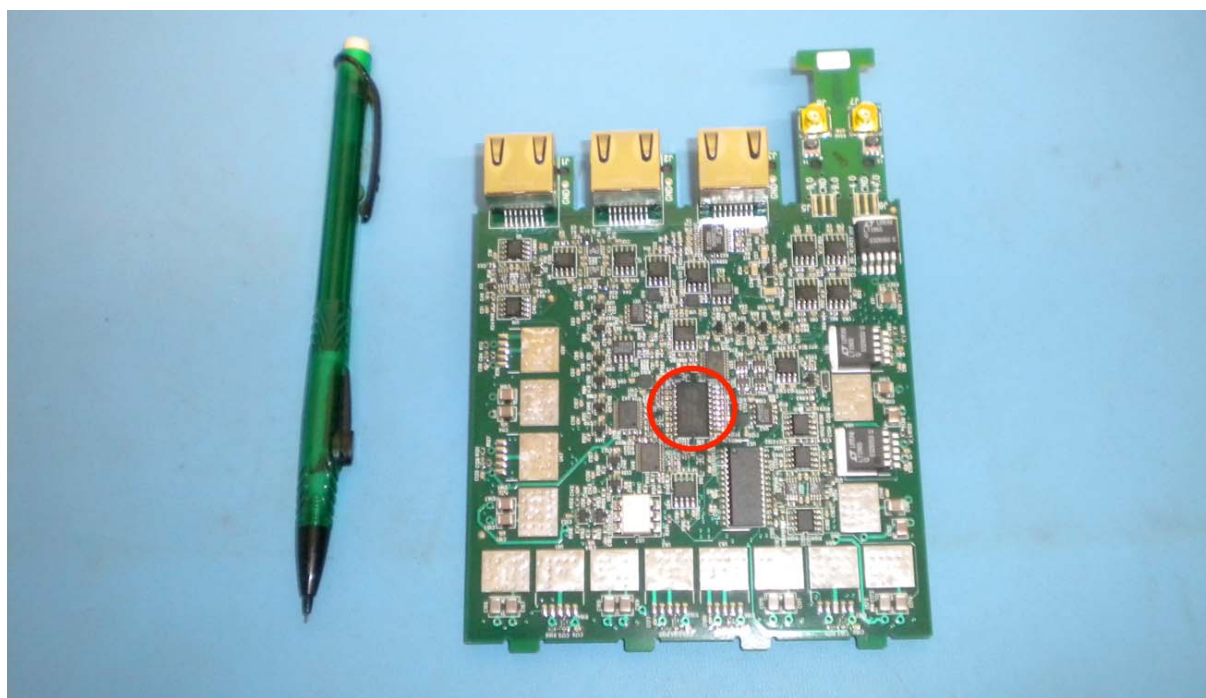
Photograph of the prototype AMR sensor board. The AMR sensor chip is circled.
